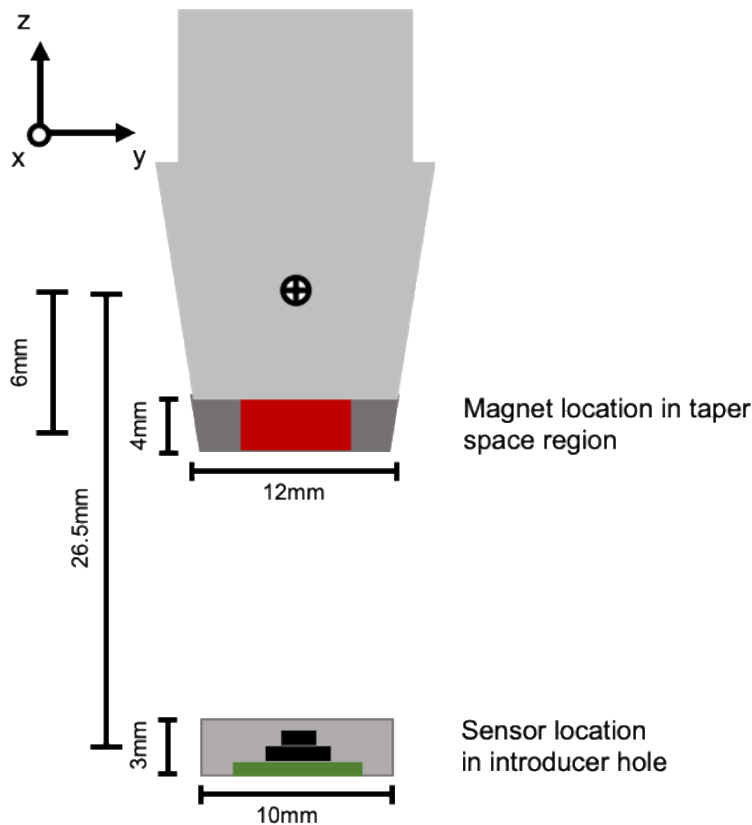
Annotated technical drawing of possible regions for sensor and magnet location
